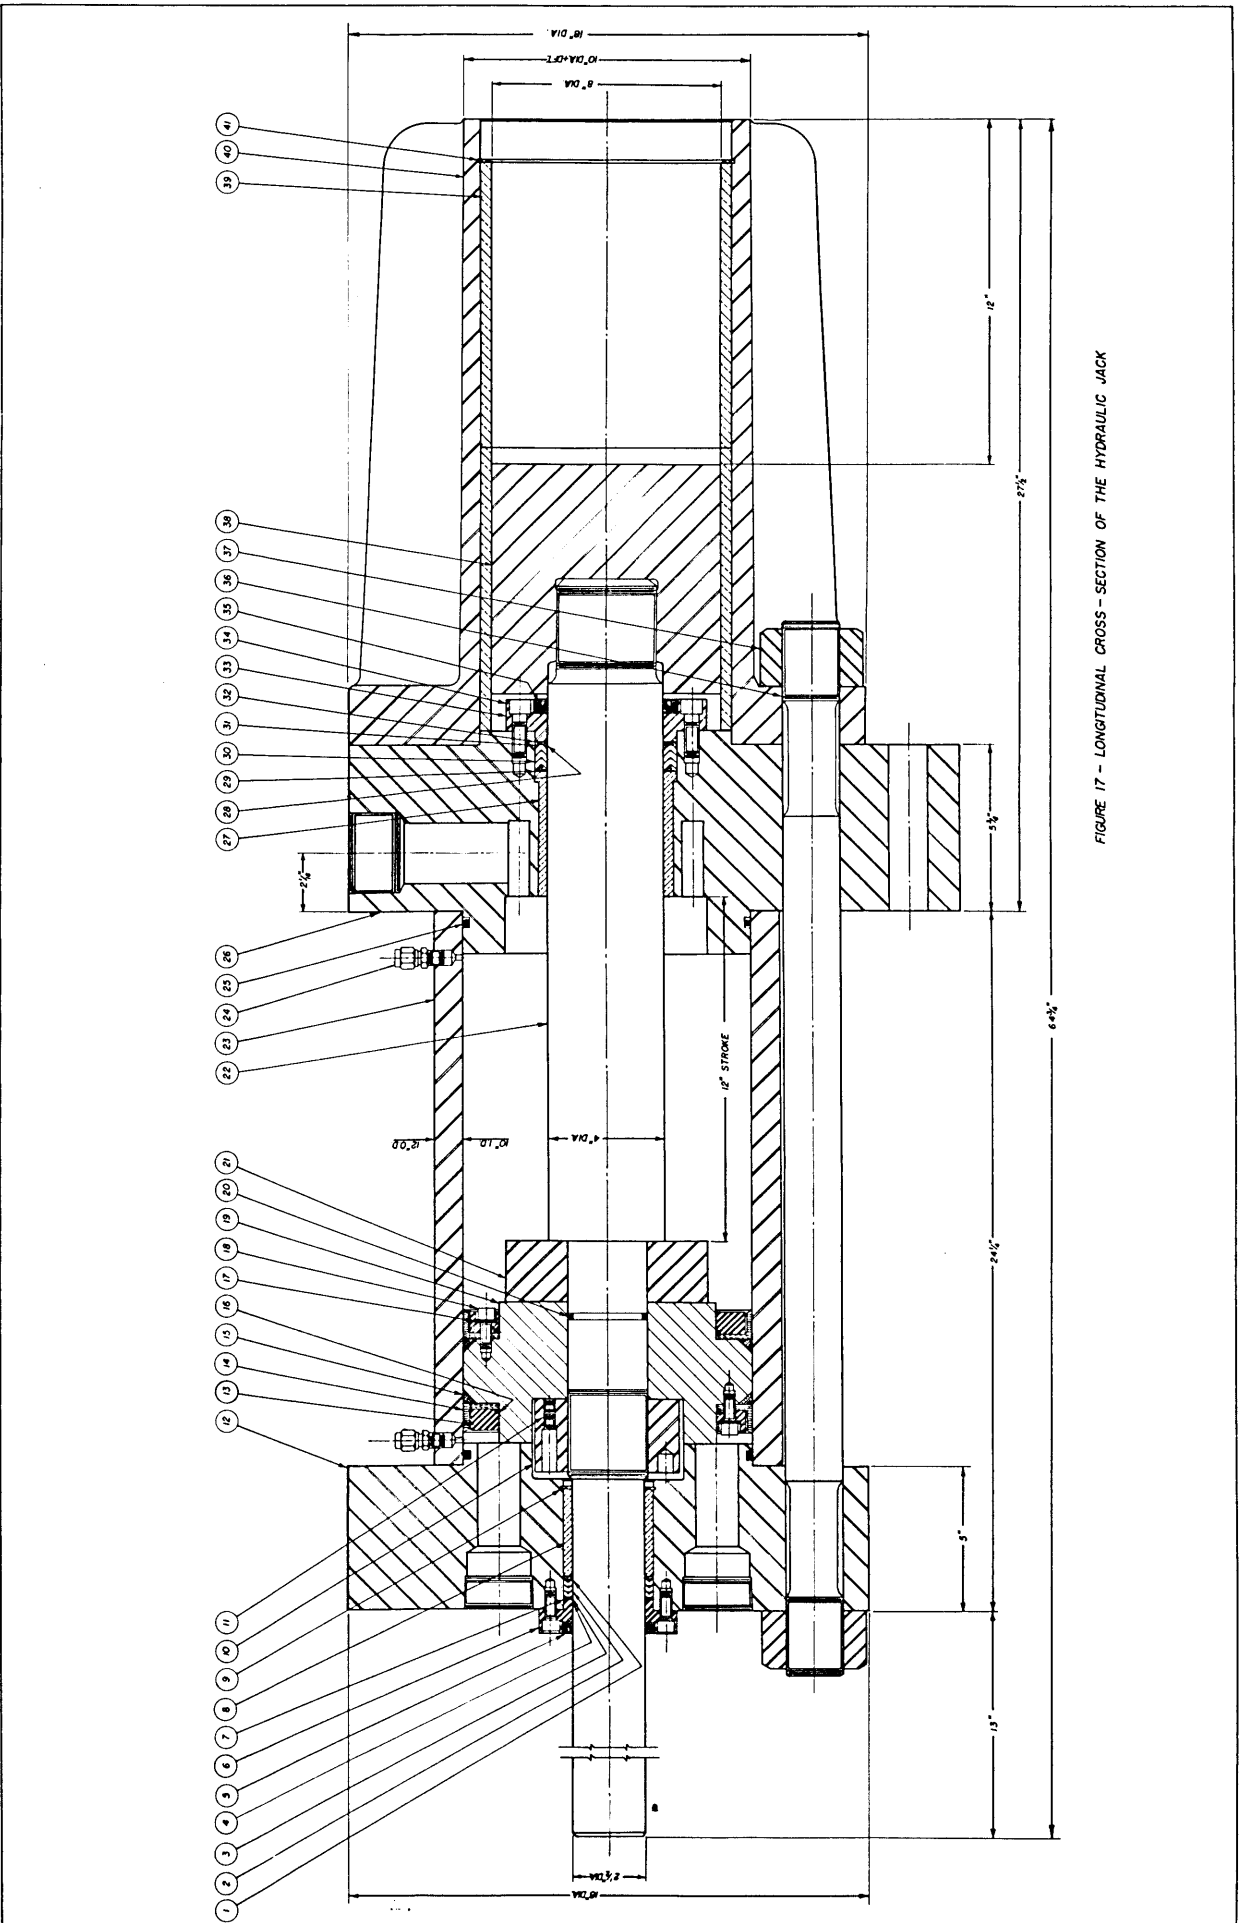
LONGITUDINAL CROSS - SECTION OF THE HYDRAULIC JACK
